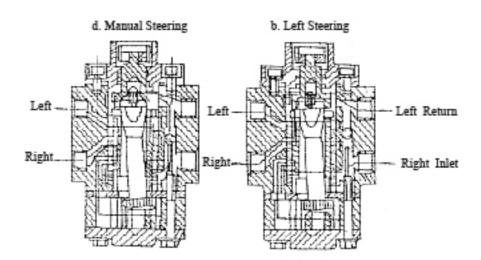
Drawing for Oil Circuit of Steering Unit
